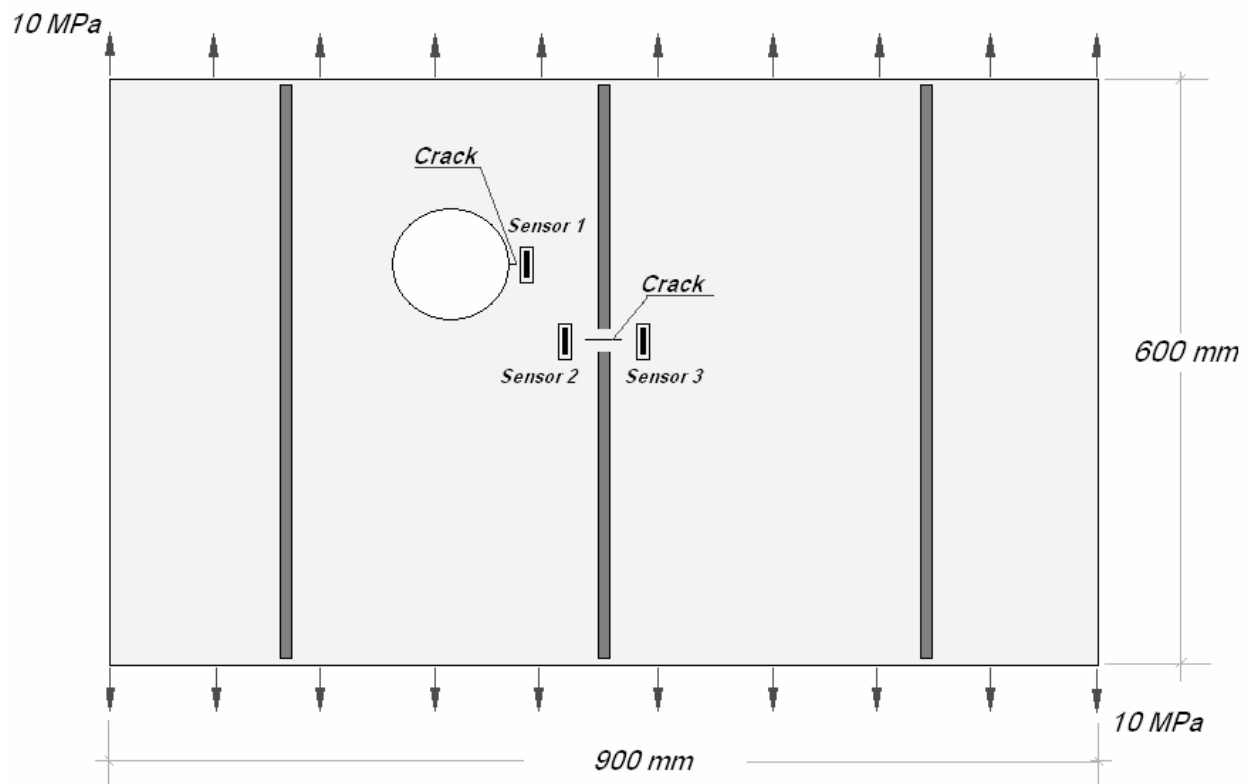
Aluminium panel with rivet stiffeners and cracks.
